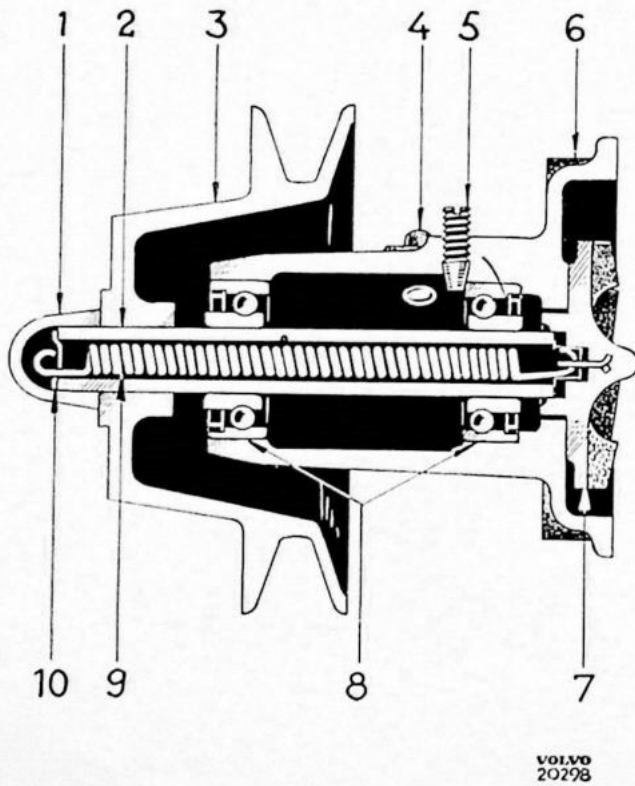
Water pump, earlier version. Mounted on engines up to no. 8668.
